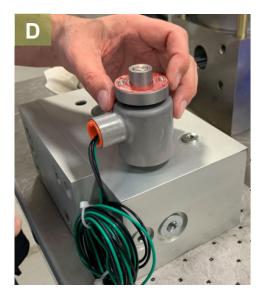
Remove Solenoid Nut and Electric Cables.
